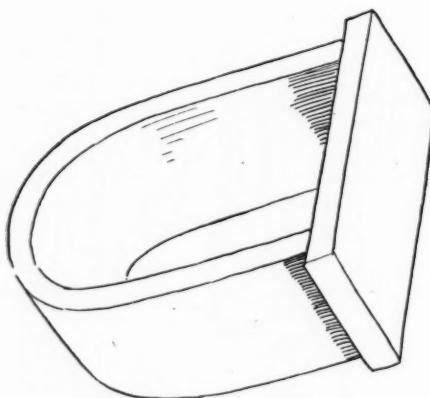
A magnet should be bridged like this whenever removed from the magneto to retain the magnetism
